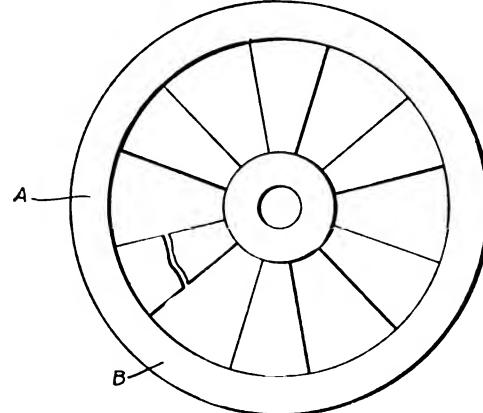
The wheel may be cut at A and B and welded later
